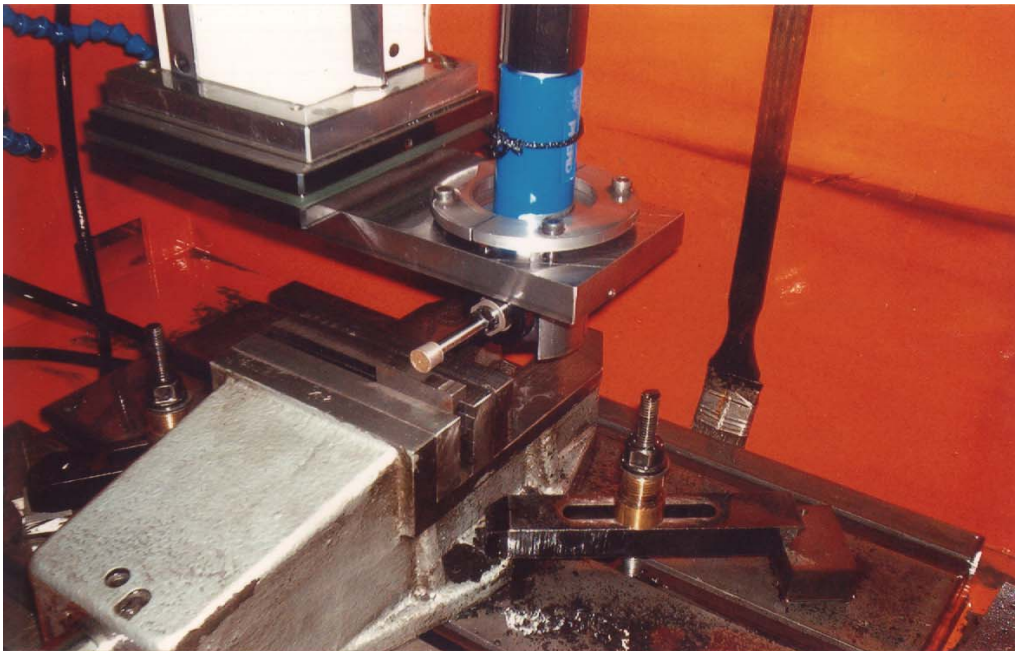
View of experimental setup for investigating the hybrid electro-erosion-abrasive machining on the FORM - 2LC ZNC
